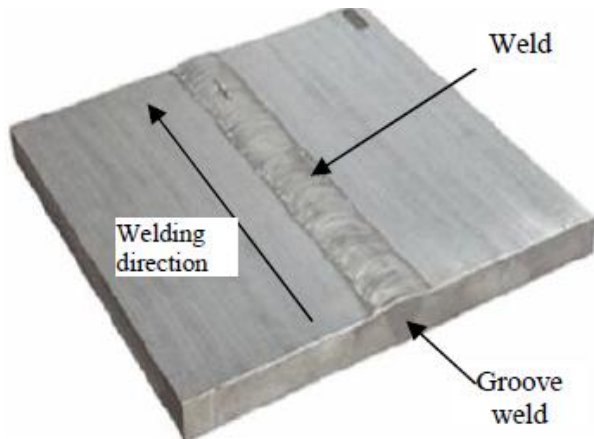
Actual image of the butt weld using Single-V joint design in the present work
